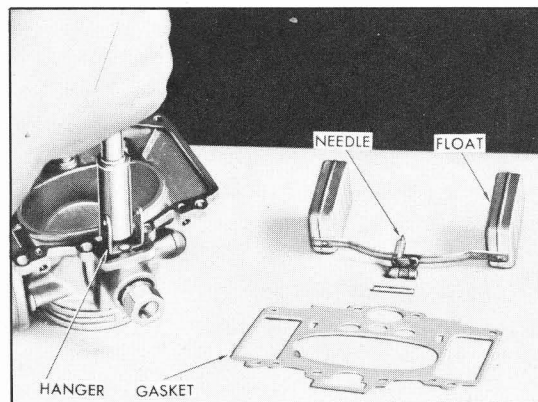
Removing Needle Valve Seat and Float Hanger
